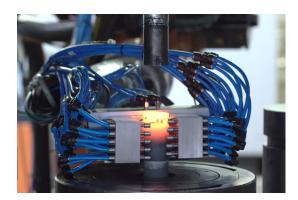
Pin gripper transferring a hot hybrid workpiece into the forging machine
